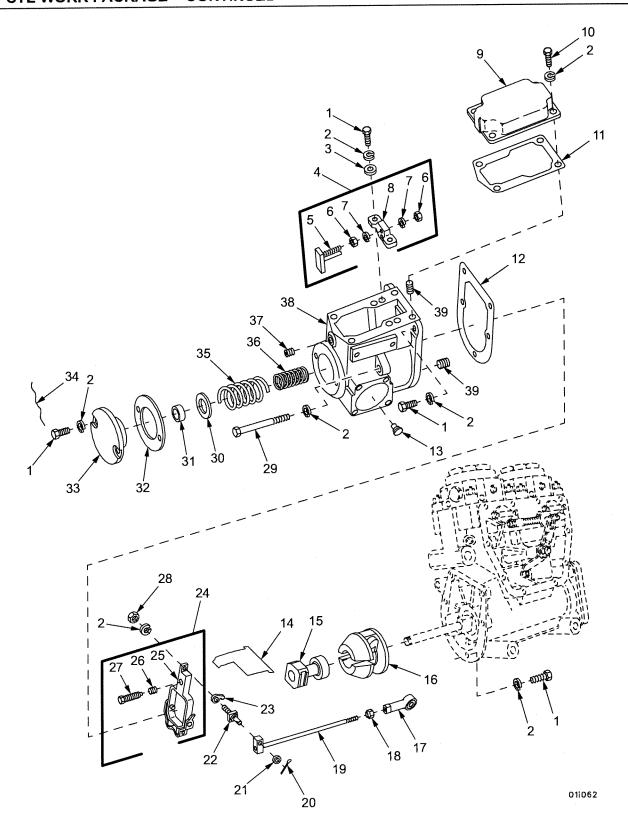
Governor Housing, Fulcrum Lever, Sleeve Assembly, Weight and Spider Assembly and Associated Parts.
